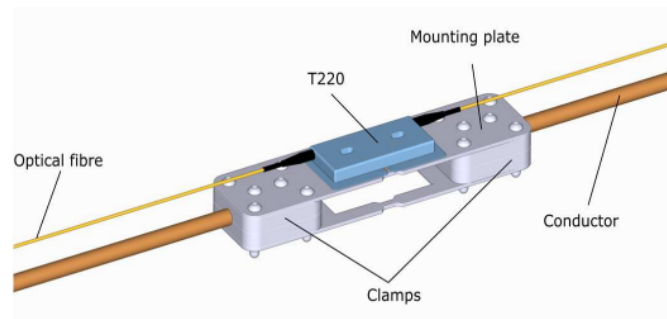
Schematic representation of the optical sag sensor assembly. The commercially available T220 FBG strain transducer contains the integrated FBG sensing elements and is spot-welded to a custom SS304 mounting plate, which is clamped to the conductor [4].
